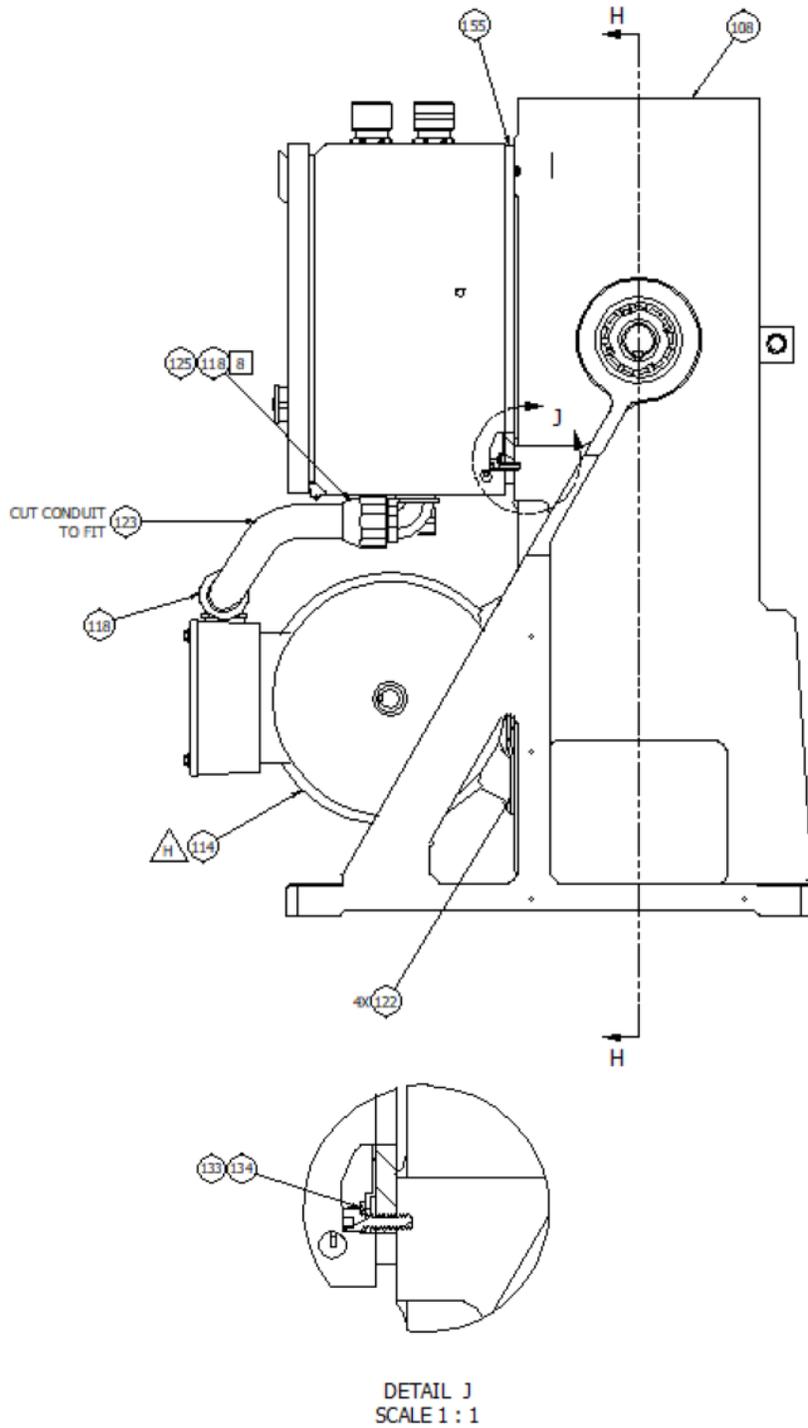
MOTOR AND CONTROL BOX MOUNTING
